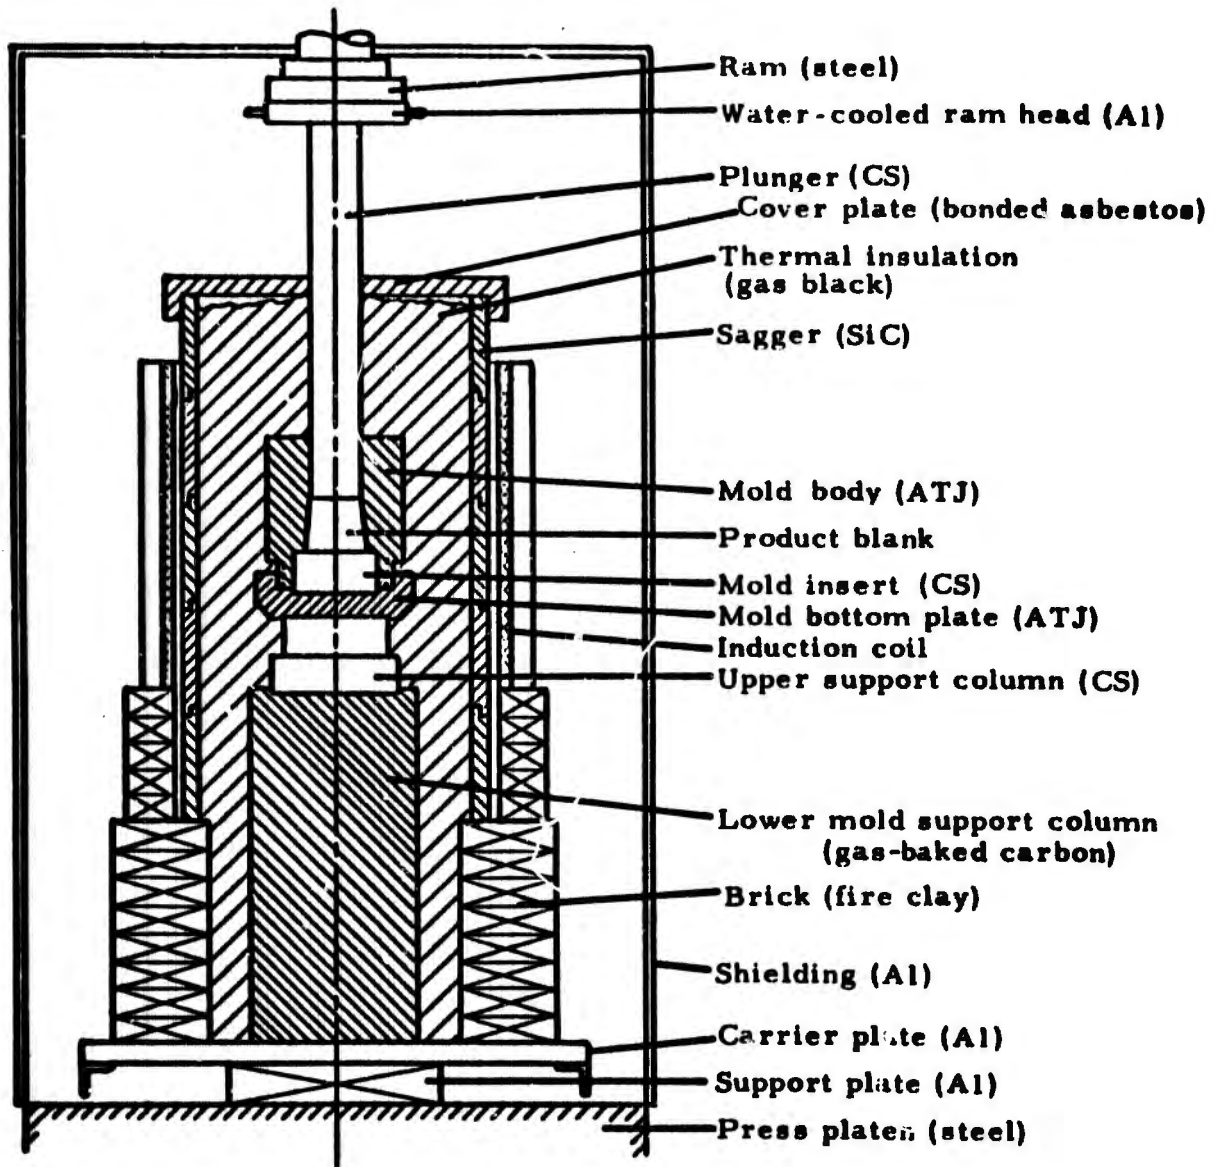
Closed End JTA Mold. Single Acting Ram Design Was Used for Hot-Pressing 3-in. Through 14-in. o. d. Billets.
